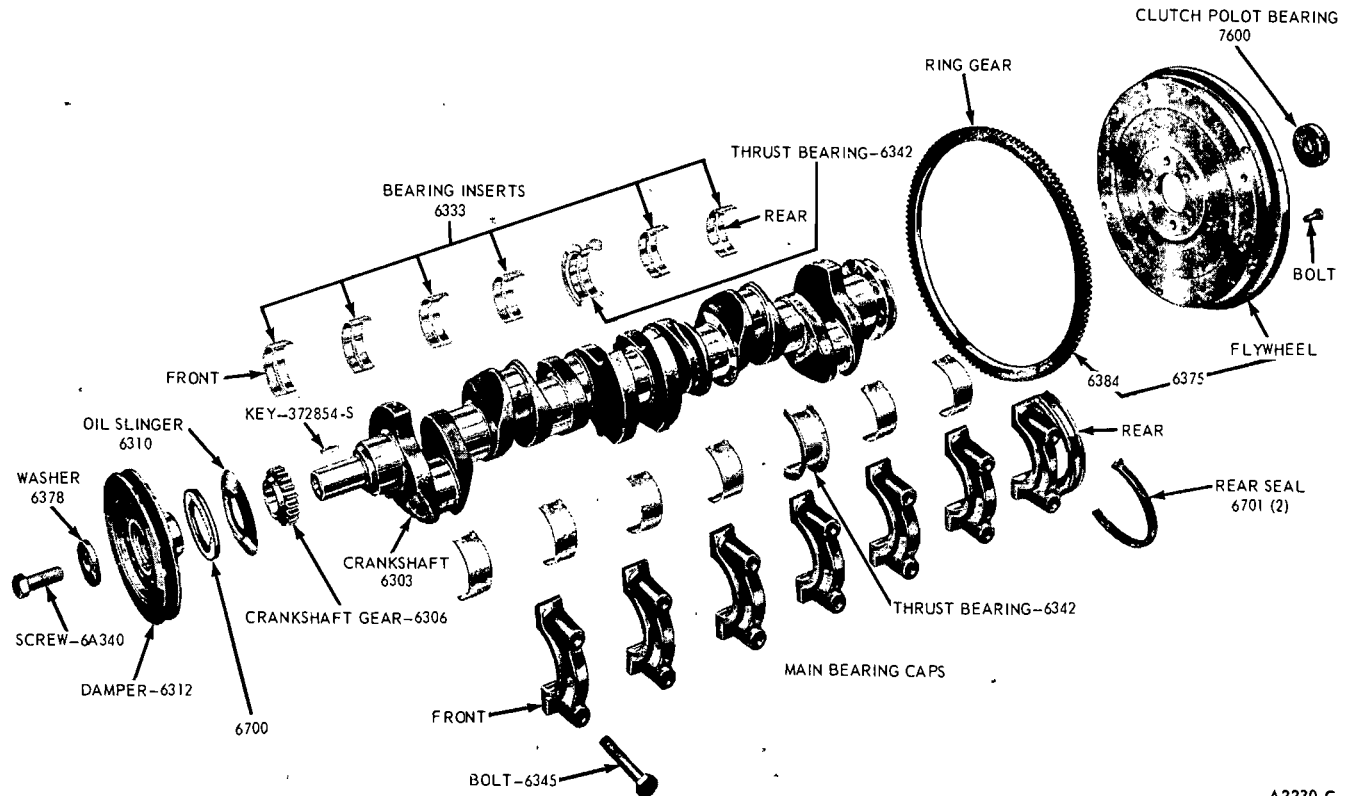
Typical 170 Six Crankshaft and Related Parts
